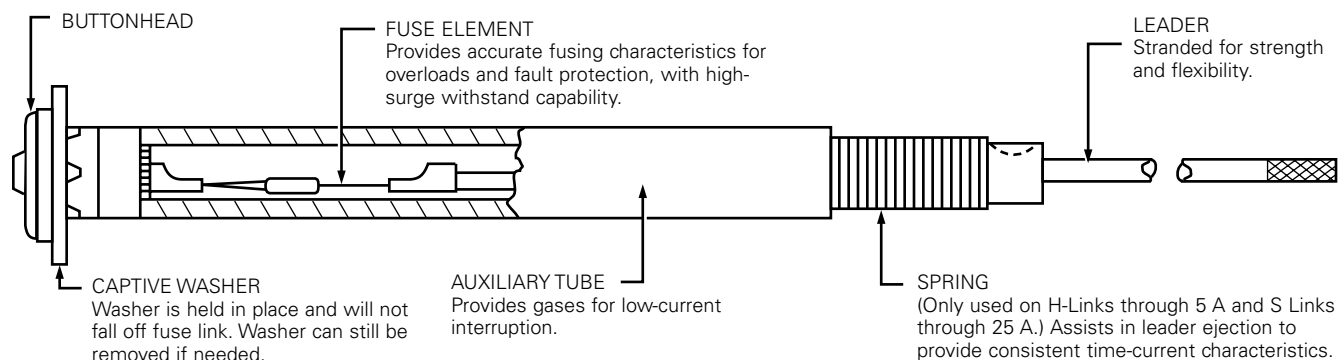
Typical type D, S, and H (1 A through 5 A) fuse link construction.
